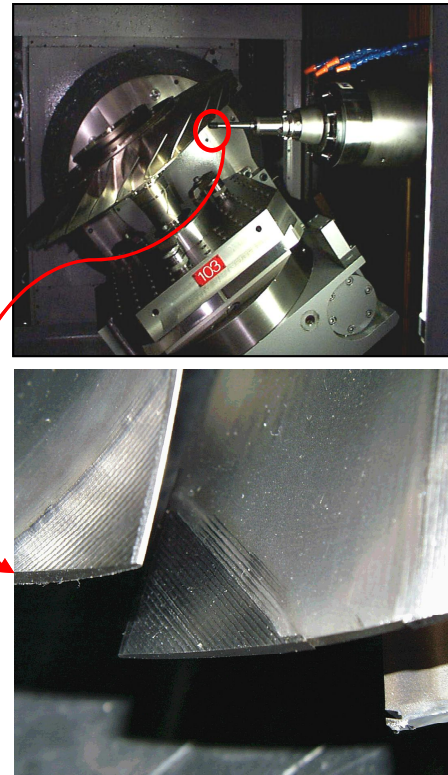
and 11 ADAPTIVE MILLING OF WELDED PATCH
